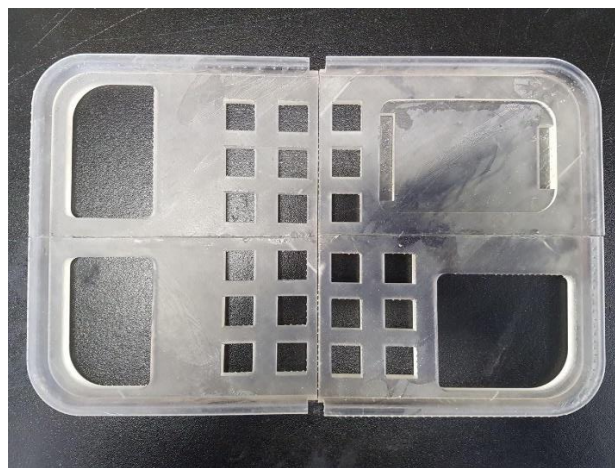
The first version of designed and 3D printed model of the tray. This prototype is printed by a Formlabs Form 2 3D printer using clear resin. This model has 8mm×8mm mesh size that is too large for preventing the mouse from accessing the components on the tray. In addition, the water bottle space was not large enough to store the required water for the mouse. The thickness of the tray in this model was 1 cm which has been reduced in the next versions.
